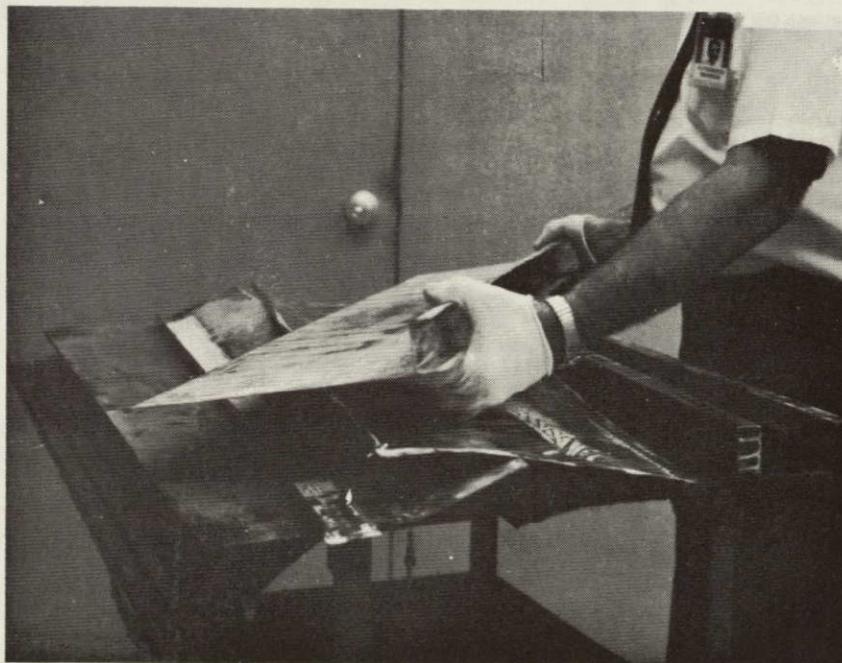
SECONDARY BOND ASSEMBLY FOLLOWING
